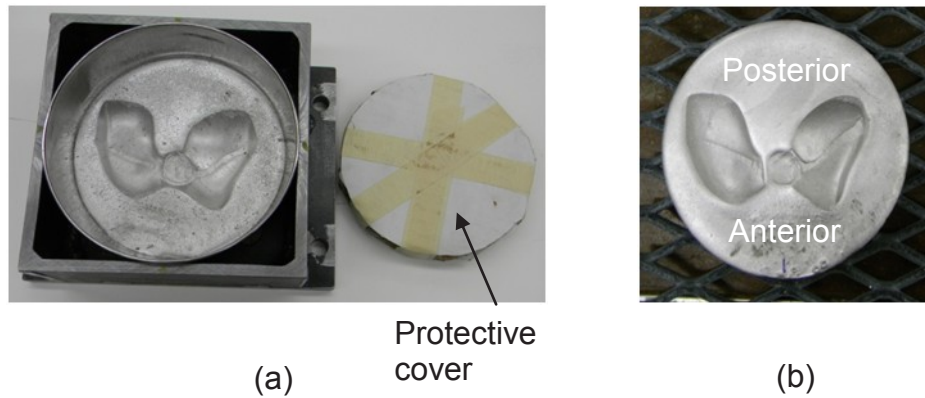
Condylar castings. (a) Bottom grip with casting, (b) Final casting
